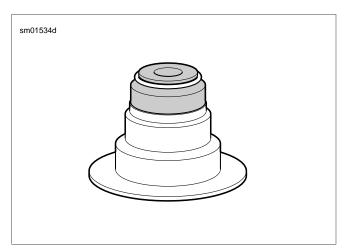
Valve Seal and Lower Valve Collar Assembly (seal and lower collar replaced as assembly only)
